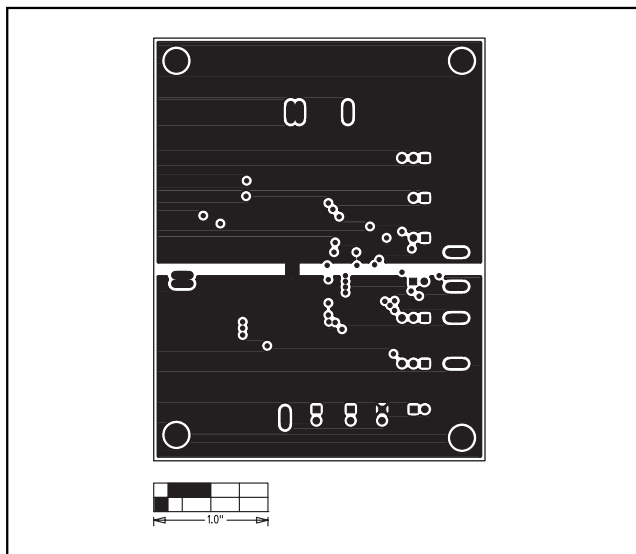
MAX1845 EV Kit PC Board Layout—Internal GND Plane (Layer 2)
